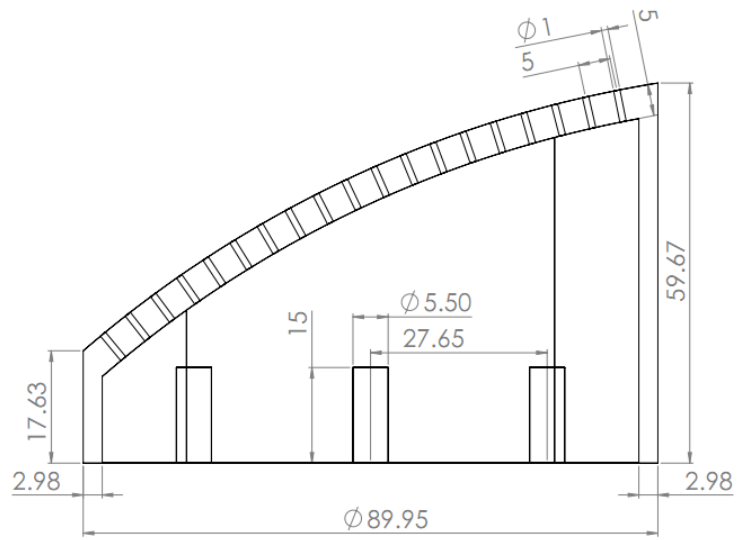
2D schematic of the insert of pressure taps (side view), dimensions are in mm.
